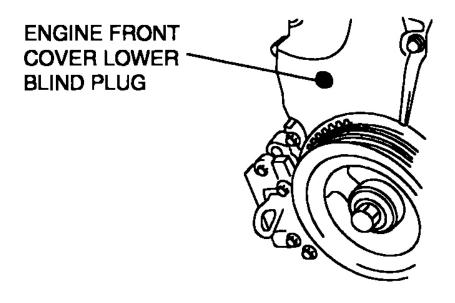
Installing Cylinder Block Lower Blind Plug Courtesy of MAZDA MOTORS CORP.
